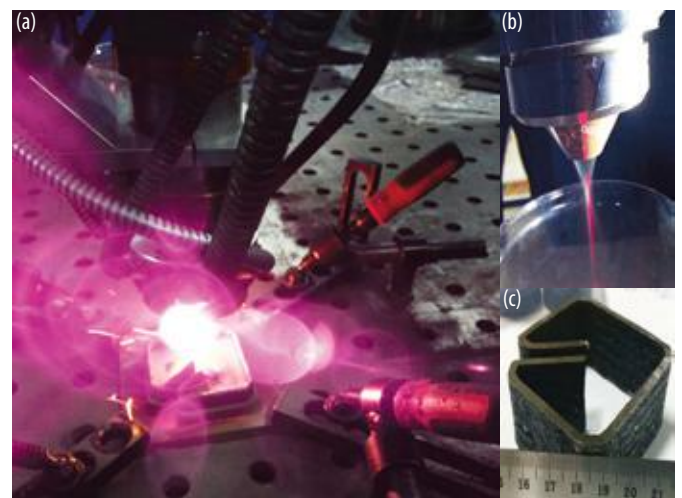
Photographs showing (a) process arrangement (b) co-axial nozzle and laser beam (c) as build component of AISI H13 tool steel
